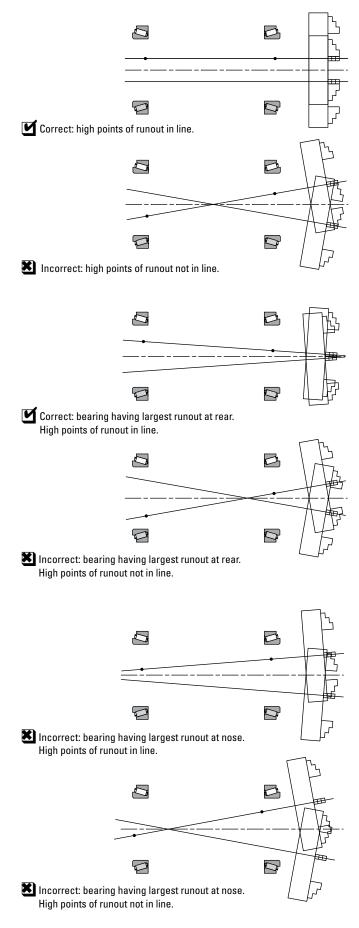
The effect of bearing runout high point locations on spindle accuracy.
